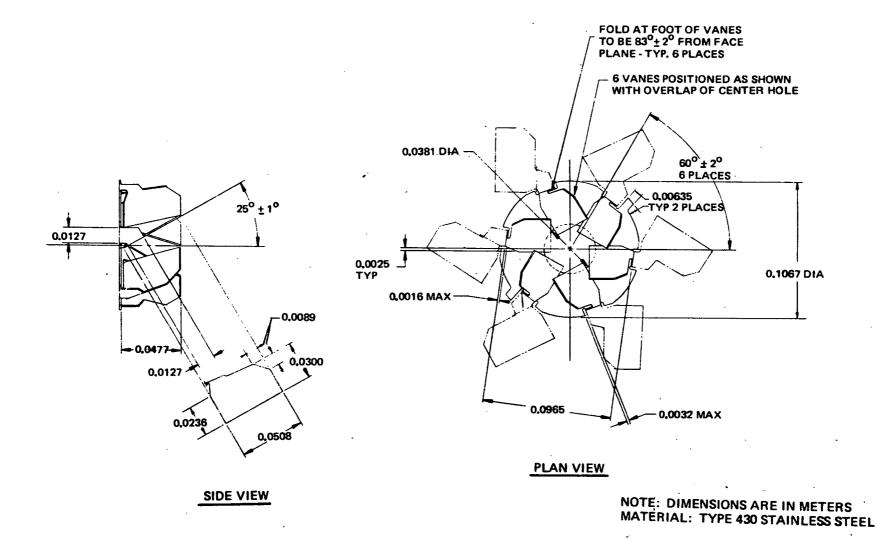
Layout drawing of the stamped-formed, sheet metal prototype optimum burner head
